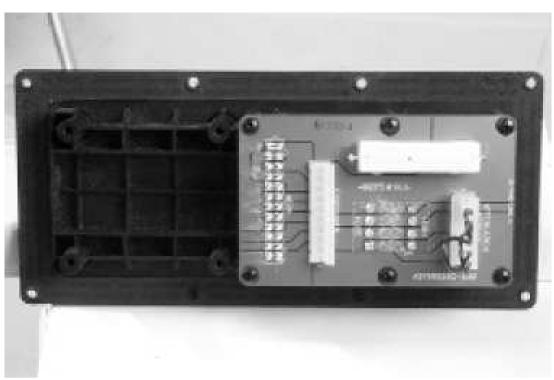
EVA input panel removed, showing the green PC board and the four bosses to which the optional EVA-AM attenuation module is attached
